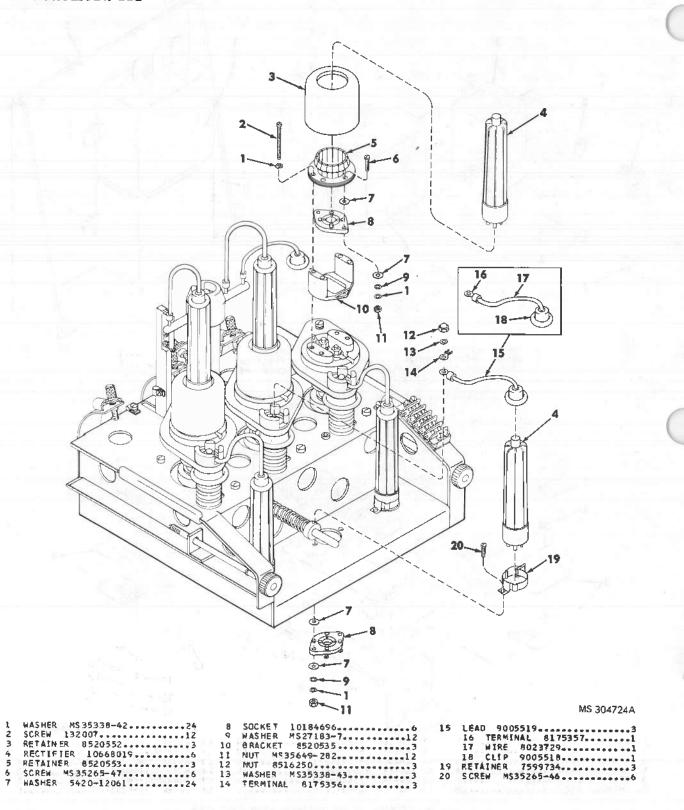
POWER SUPPLY SUBASSEMBLY /8520524/-PARTIAL EXPLODED VIEW /SEE FIGURE 4 FOR NEXT HIGHER ASSEMBLY/
